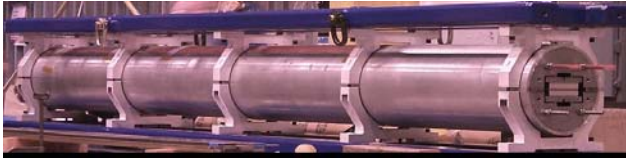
LRS01 support structure after assembly of the dummy coil-pack. The shell is clamped by aluminum cradles connected to steel beams.
